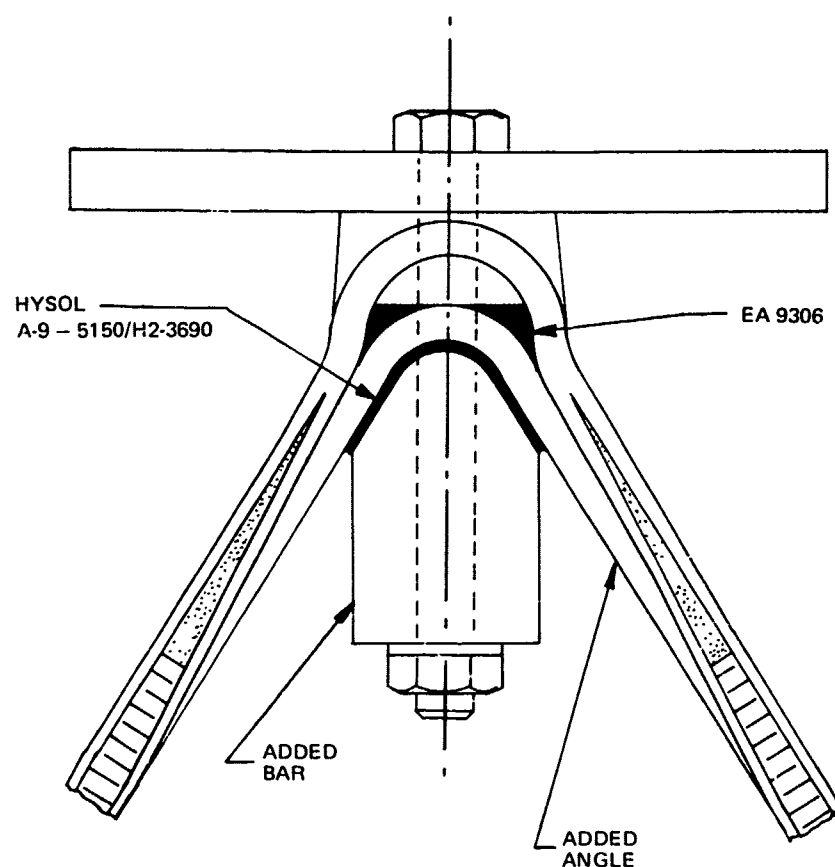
BOLTED JOINT REINFORCEMENT SPECIMEN Z5578687-505
